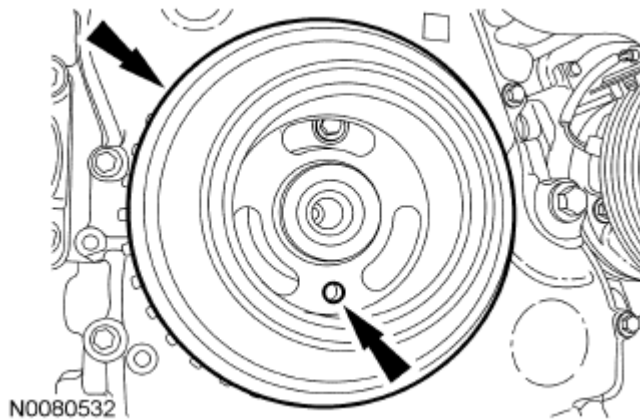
Positioning Crankshaft Pulley Onto Crankshaft With Hole In Pulley At 6 O'Clock Position
